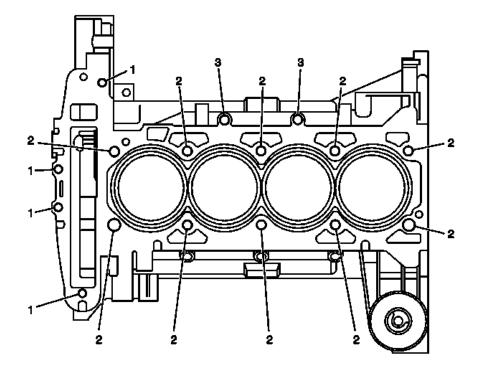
Identifying Bolt Size & Locations On Engine Block - Top
